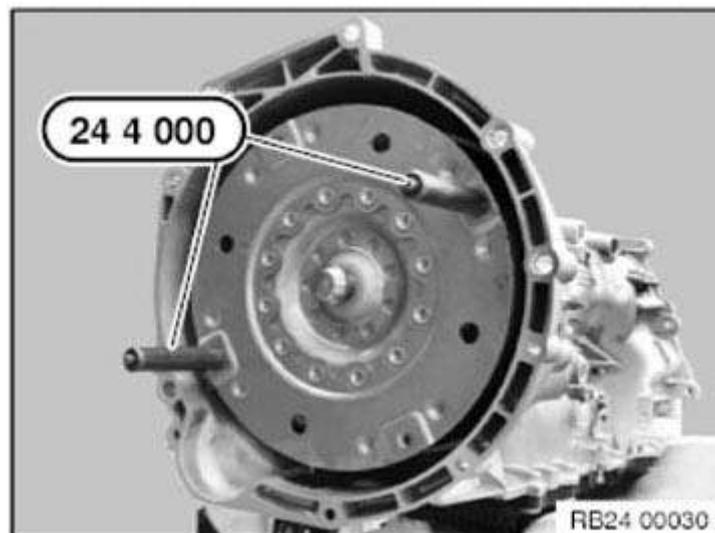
Screwing Special Tool 24 4 000 Into Torque Converter
